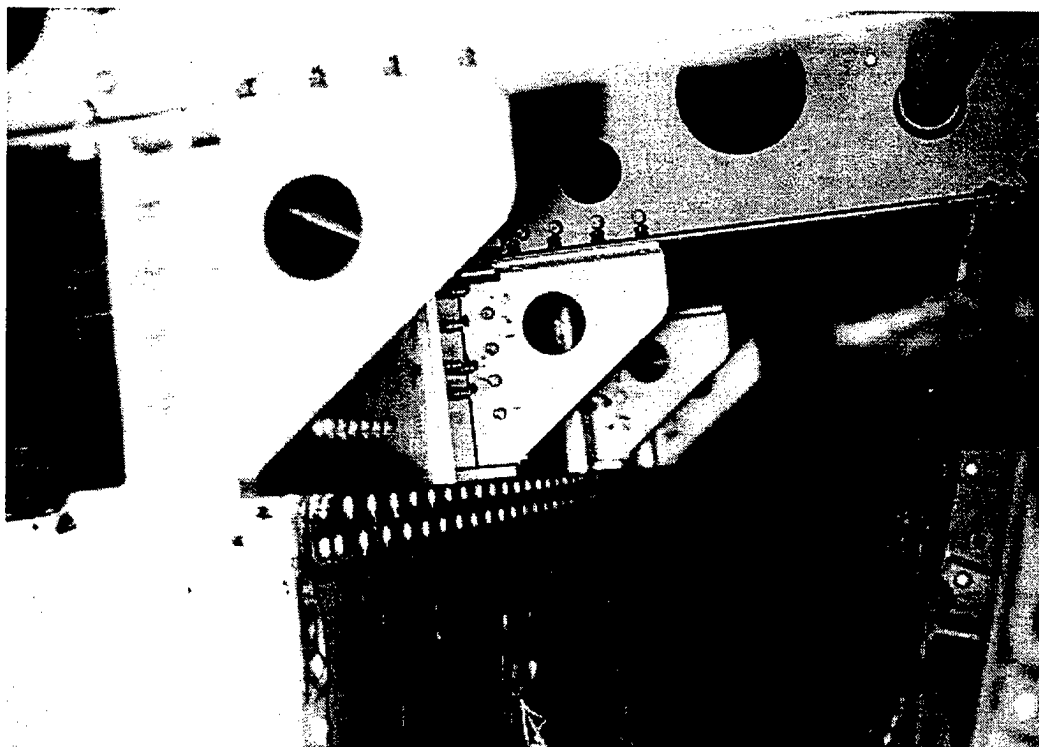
PRETEST AUXILIARY FUEL TANK LEFT ATTACHMENT FRAMEWORK
